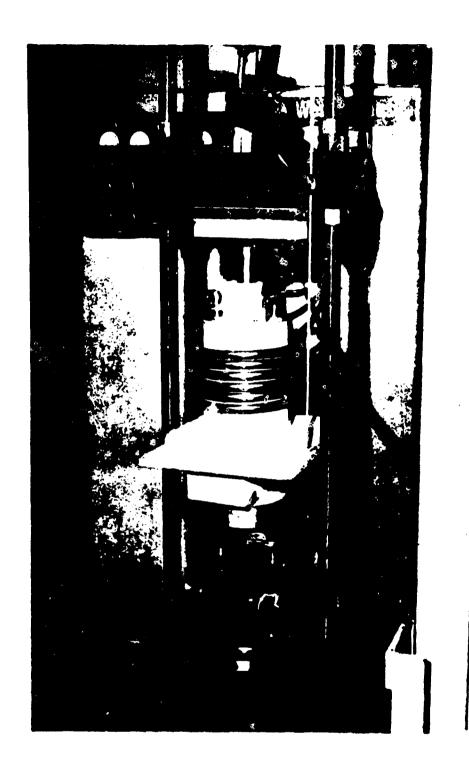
Hot Pressing Fixture Used to Compact Large Diameter Concentric Ring Seals
